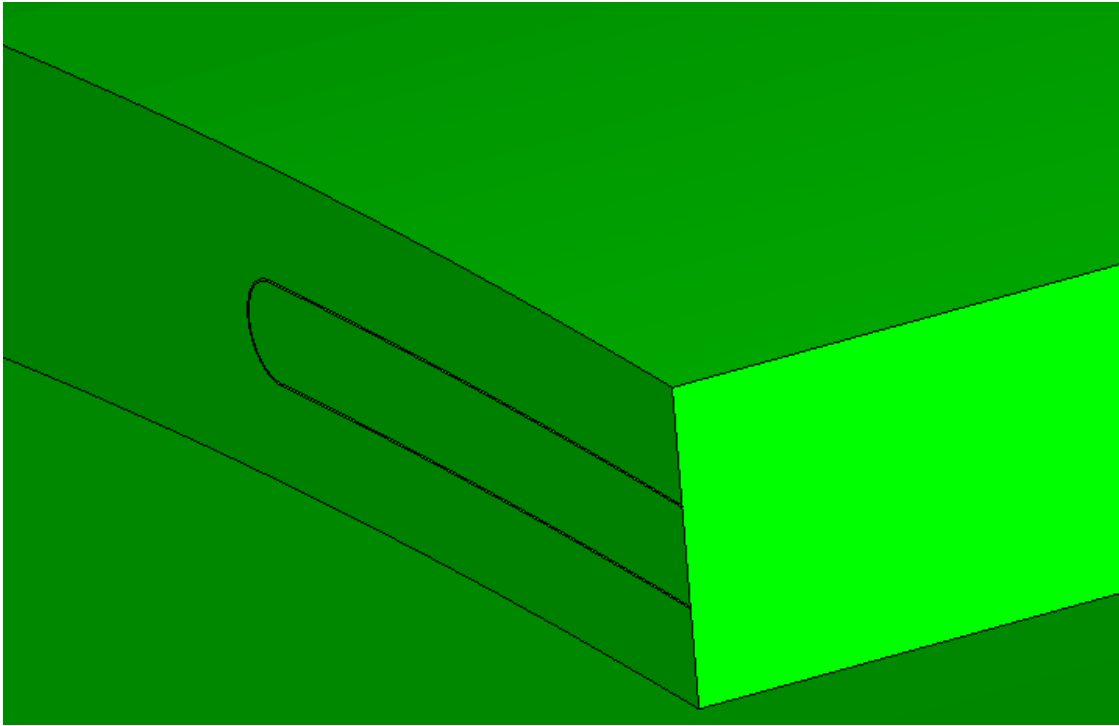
A typical buried defect with a rectangular defect shape [18]
